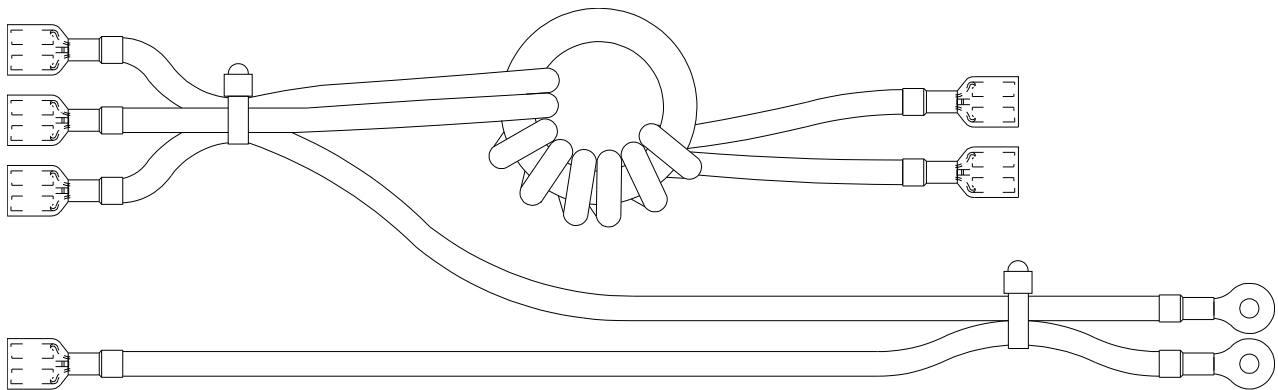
VL4000 Enclosure PFC Input Cable Assembly
